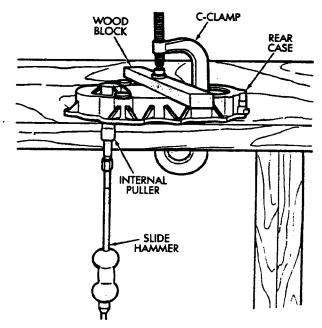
Removing Front Output Shaft Rear Bearing
